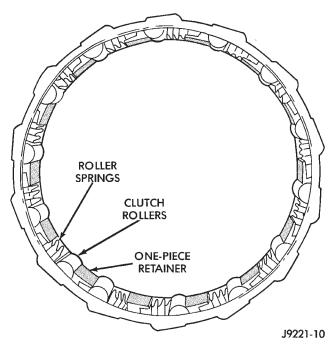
Clutch Roller, Spring And Retainer Assembly—46RH
